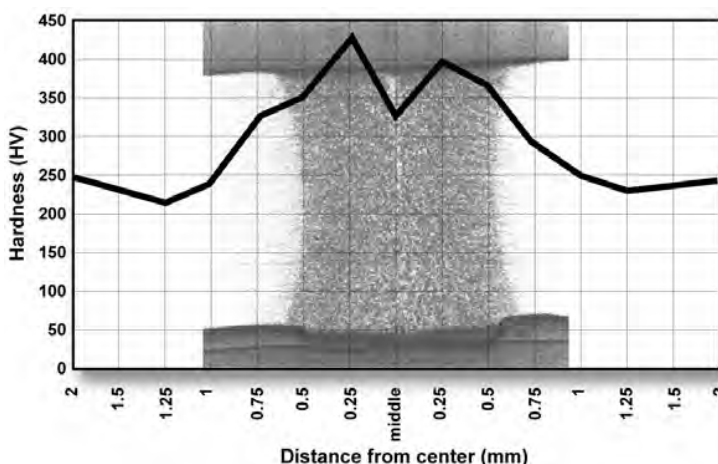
L-10: Weld hardness of a HF weld in a DP 280/600 tube.^{R-1}
